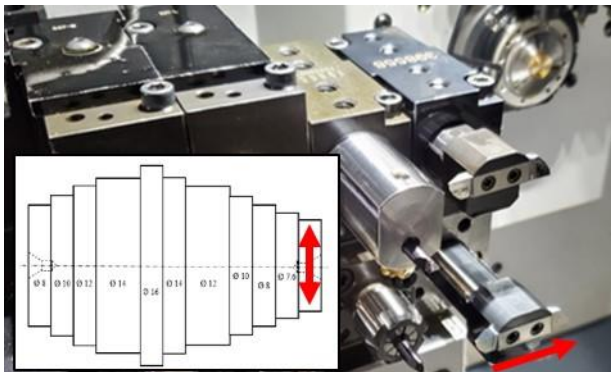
Tools are mounted onto a stationary tool holder in the working space of the Swiss-type lathe. The tool indicated with the red arrow machines the diameter indicated with the double red arrow.
